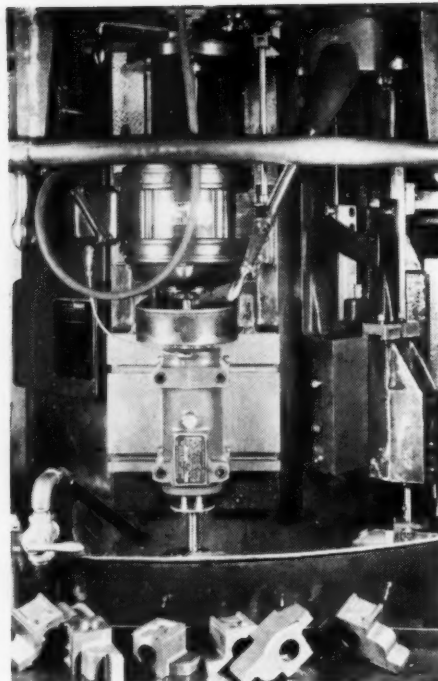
HIGH-SPEED BORING HEAD ON A BULLARD MULT-AU-MATIC BORING MACHINE
